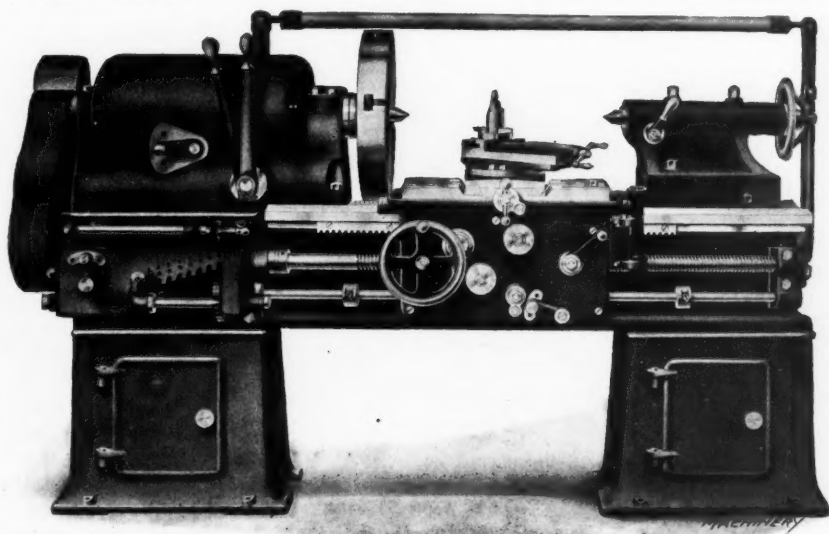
Rahn 18-inch Engine Lathe equipped with Single-pulley Drive and All-g geared Head
